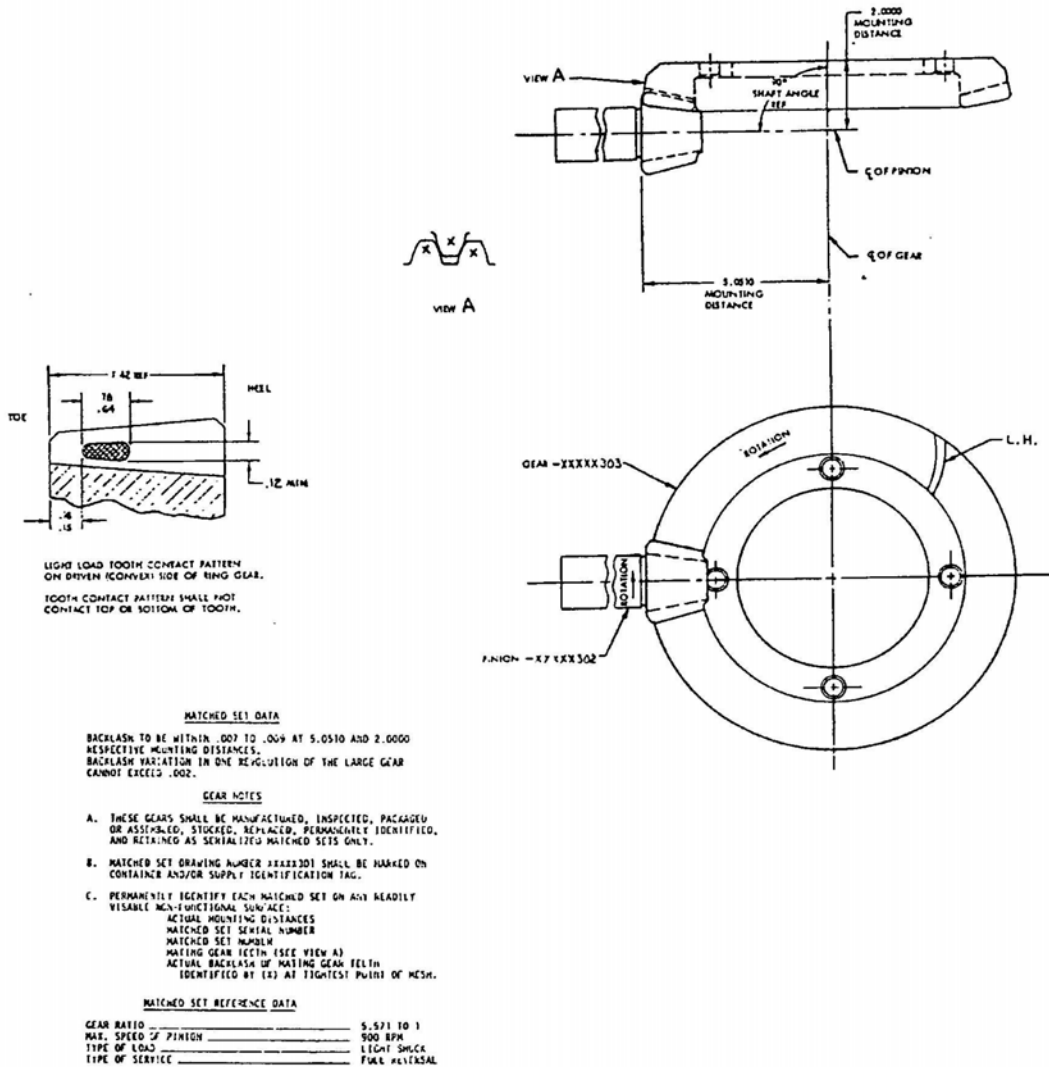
Example drawing of straight bevel, zerol bevel, and spiral bevel matched set.
